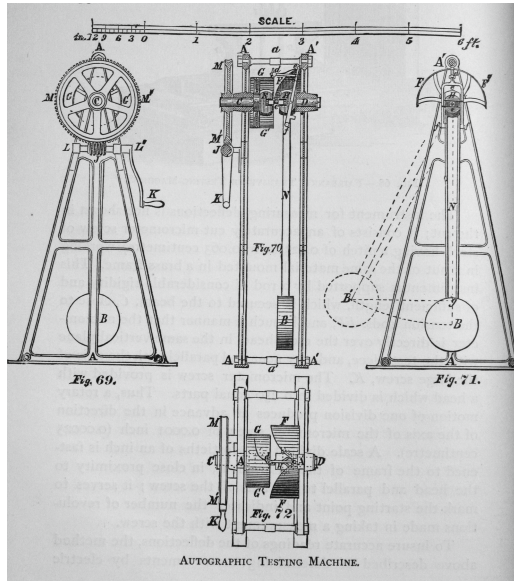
Drawing of torsion testing machine showing pendulum motion and sine cam mechanism at the bottom [14].
